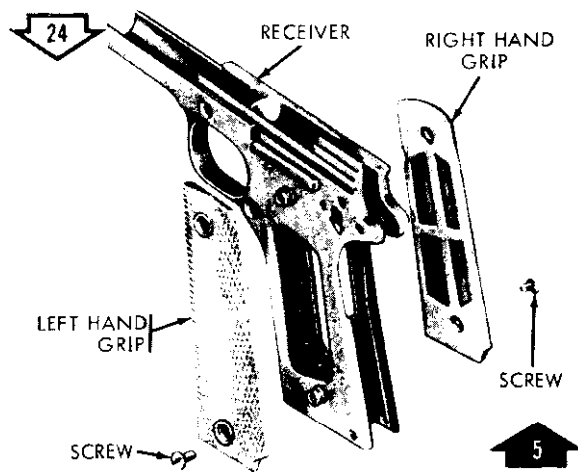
Disassembly/assembly of receiver group (5 of 7)
